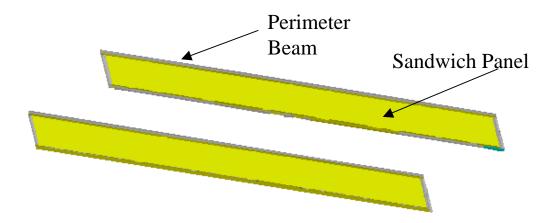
Intercity Bus Proposed Lightweight Side Truss Configuration
